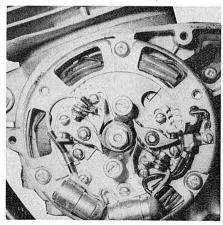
"L" mark on rotor should align with mark on base plate as ignition points for left cylinder open.
